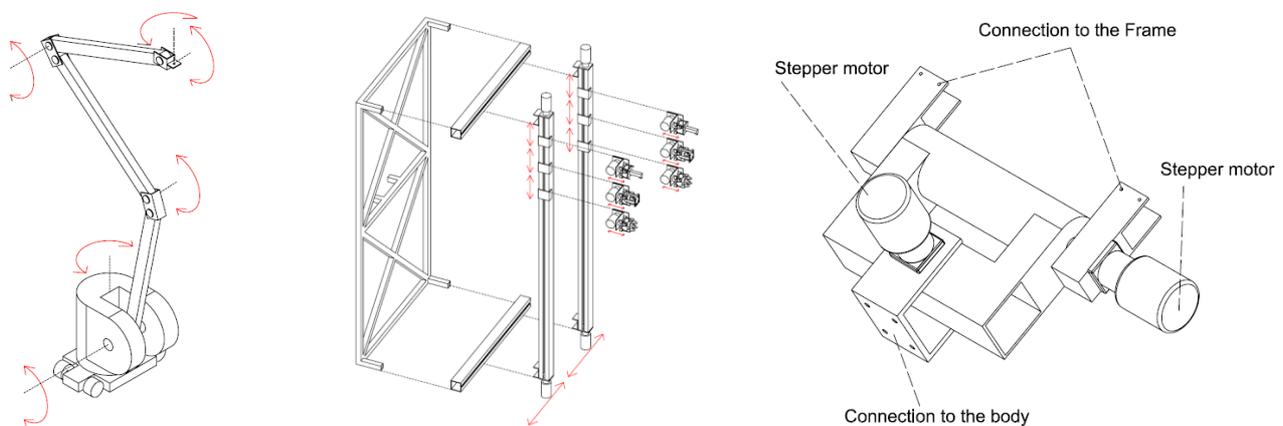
(left): Exploded view of the robot body, MEE. Figure 6 (middle): Exploded view of the MEE. Figure 7(right): fixture that connects the robot body with the MEE.
